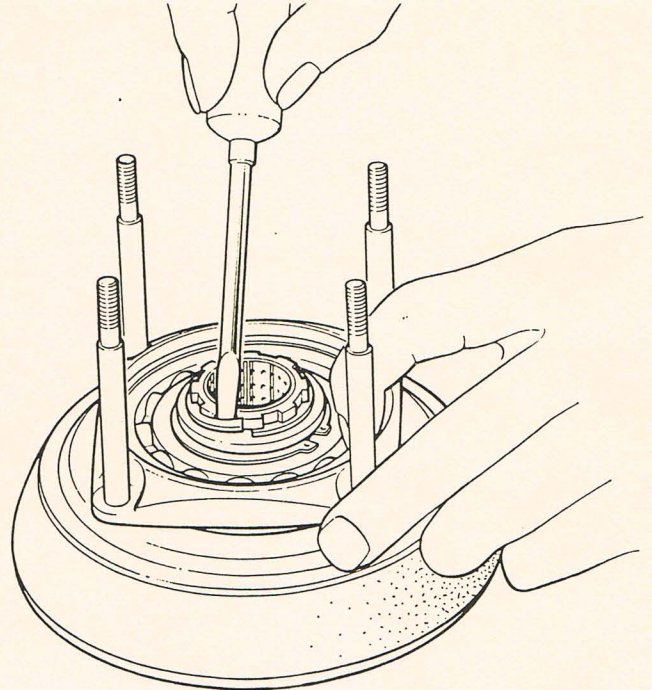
REMOVING SUNWHEEL CIRCLIP
